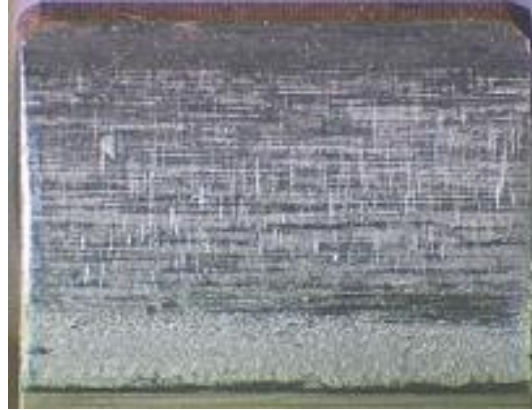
Micropitting generated at contact region of gear tooth [172]
